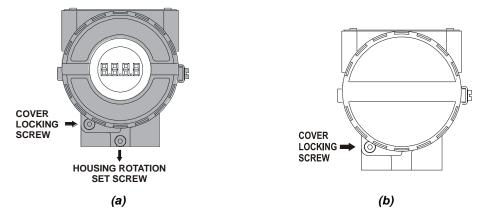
Cover Locking and Housing Rotating Set Screw (a) Electronic Board Side (b) Terminal Connection Side
